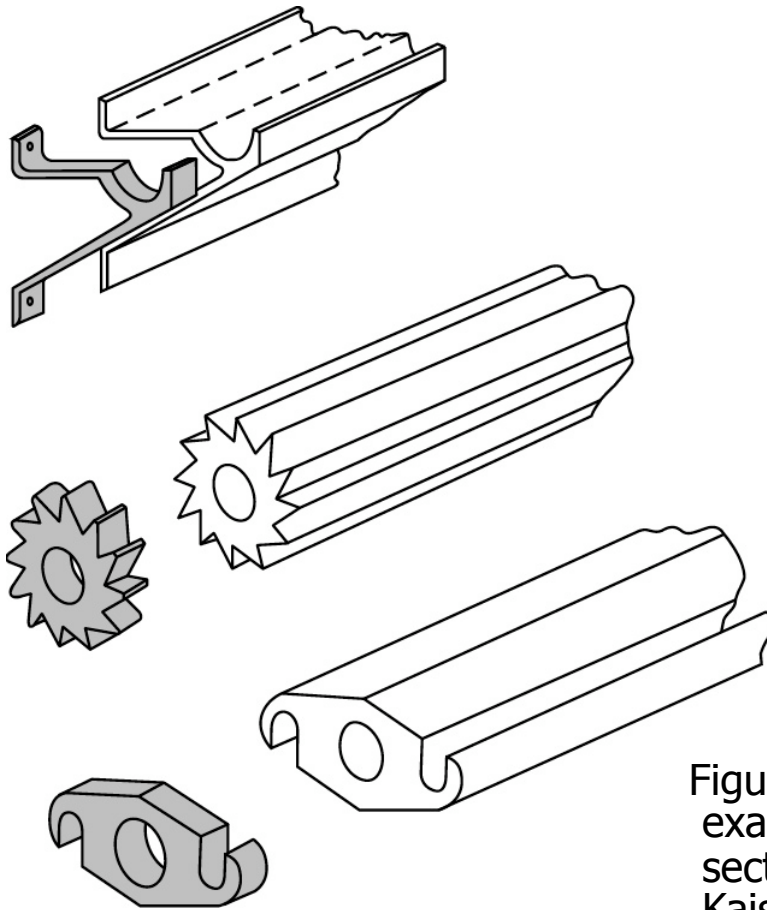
Extrusions, and examples of products made by sectioning off extrusions. *Source:* Kaiser Aluminum.
